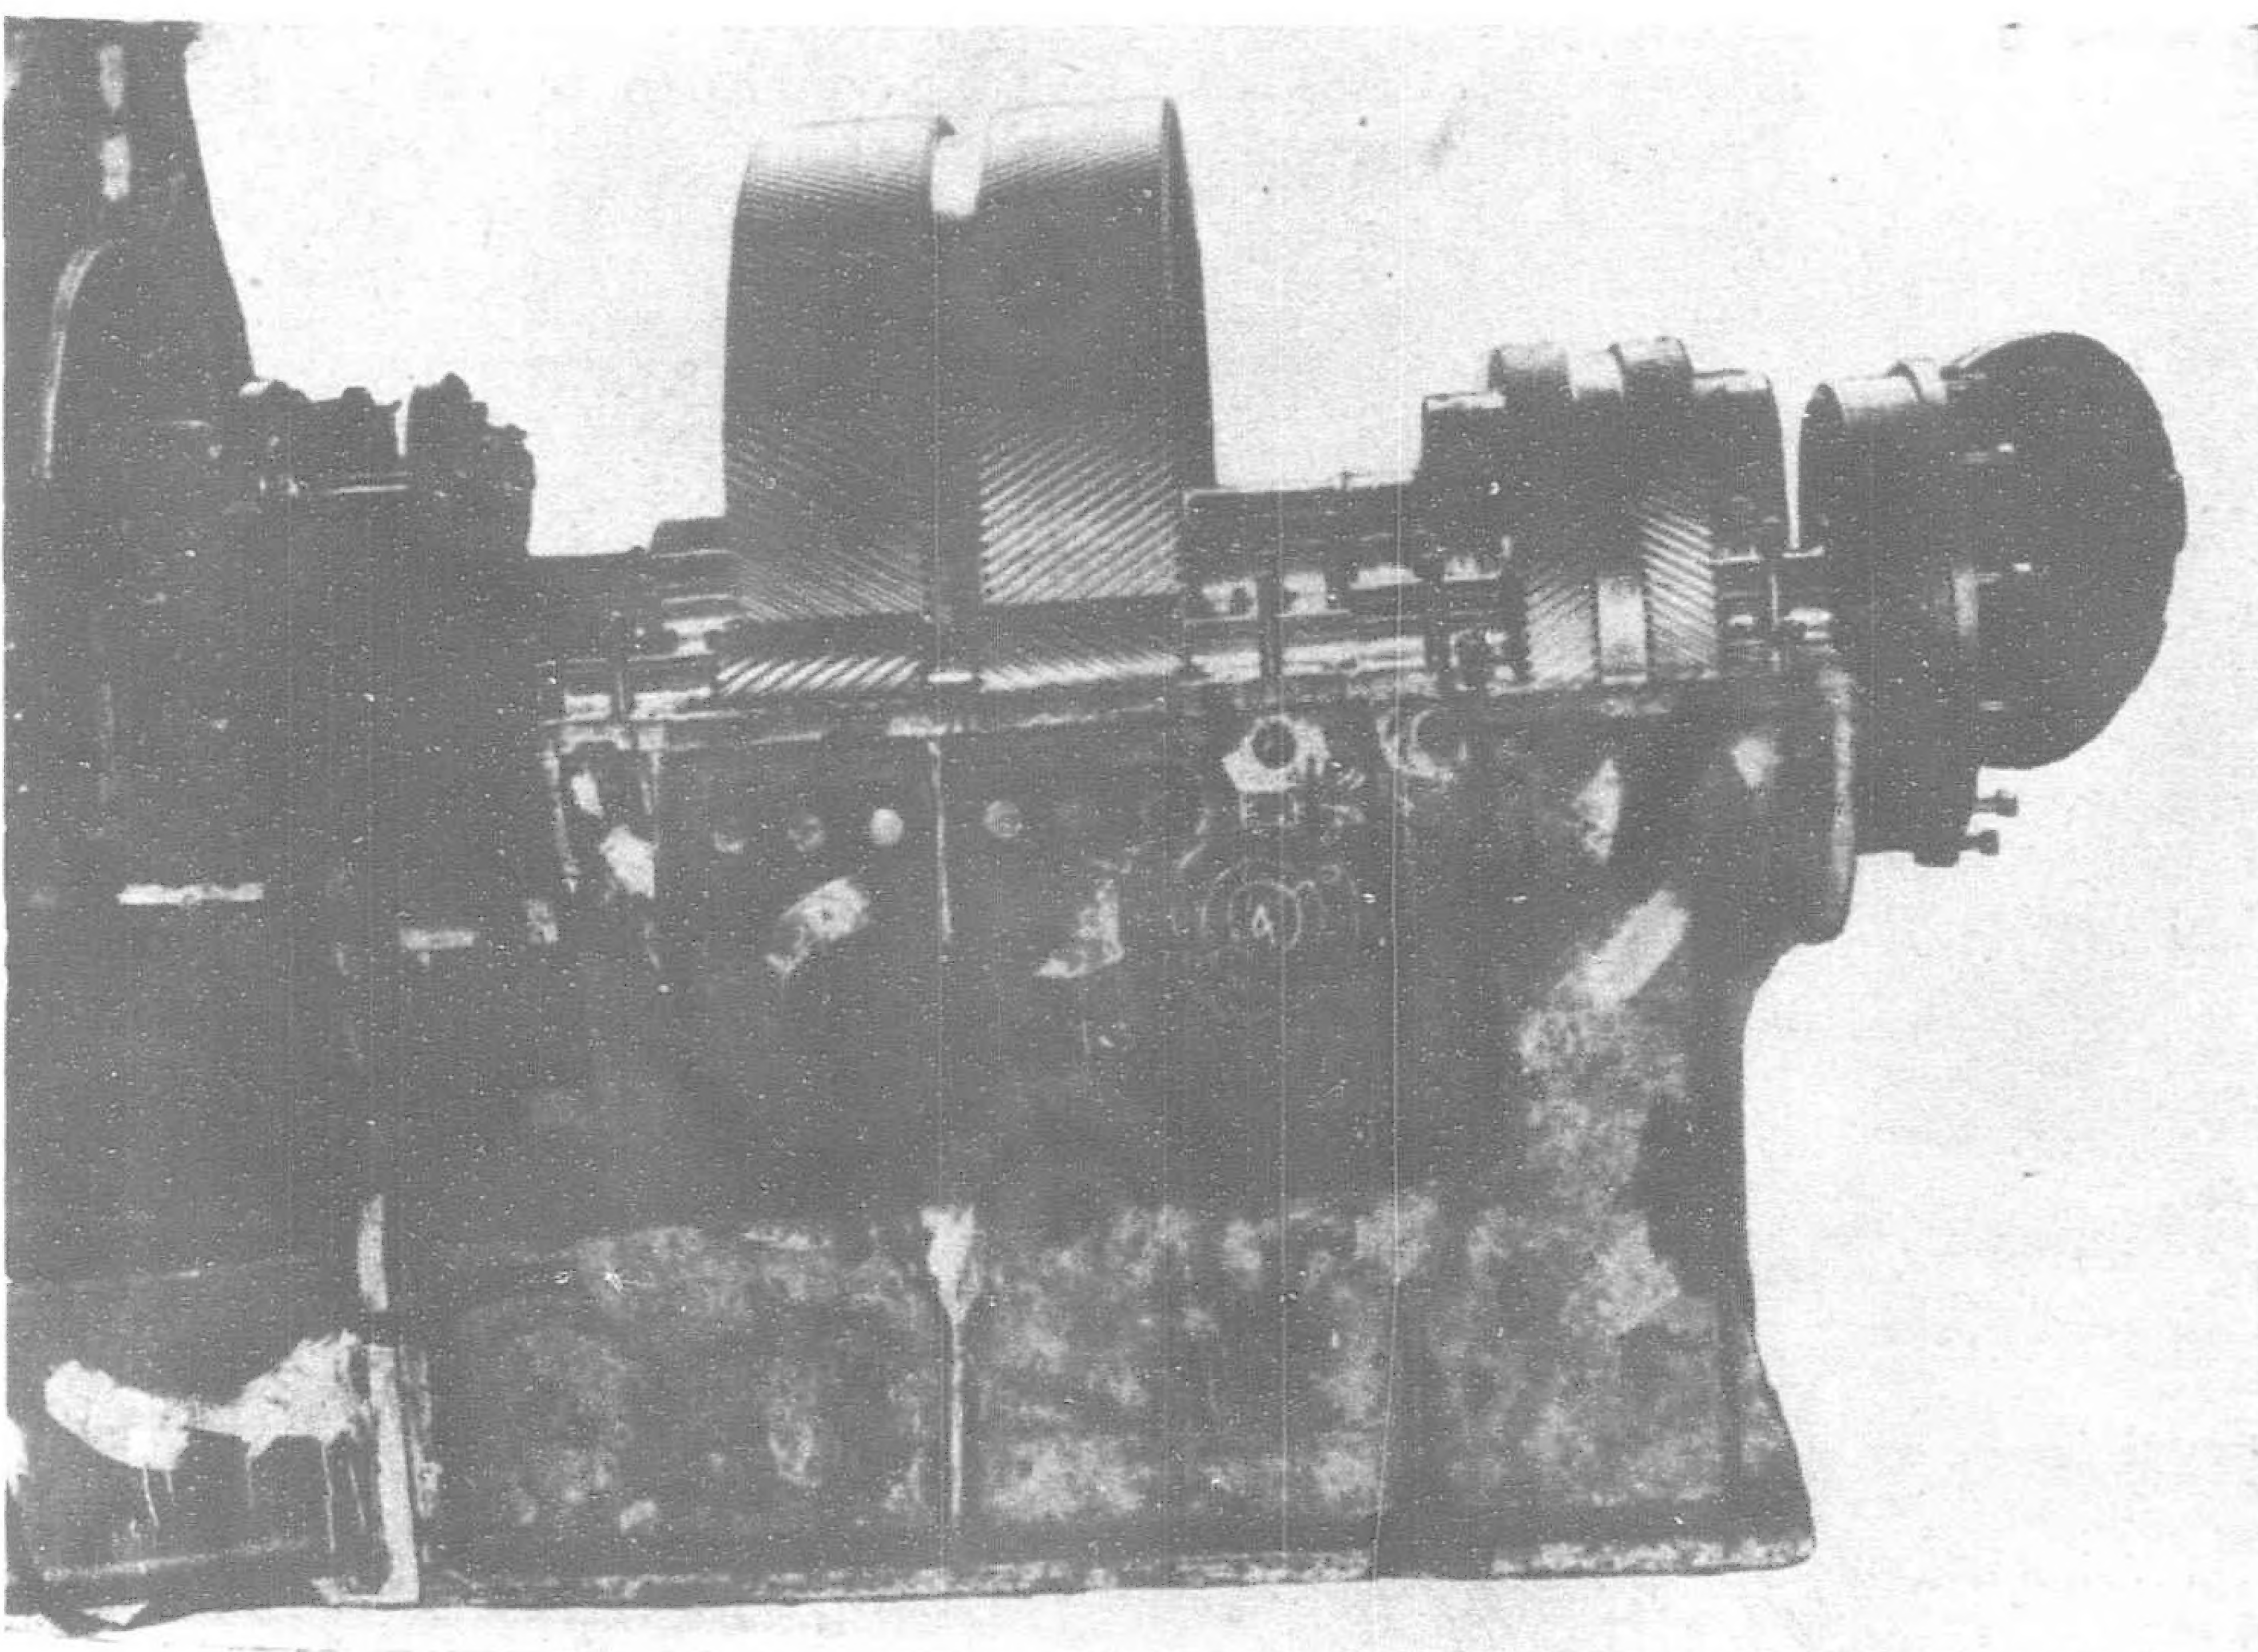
Uraga Exhaust Turbine Gearing as Overhauled
